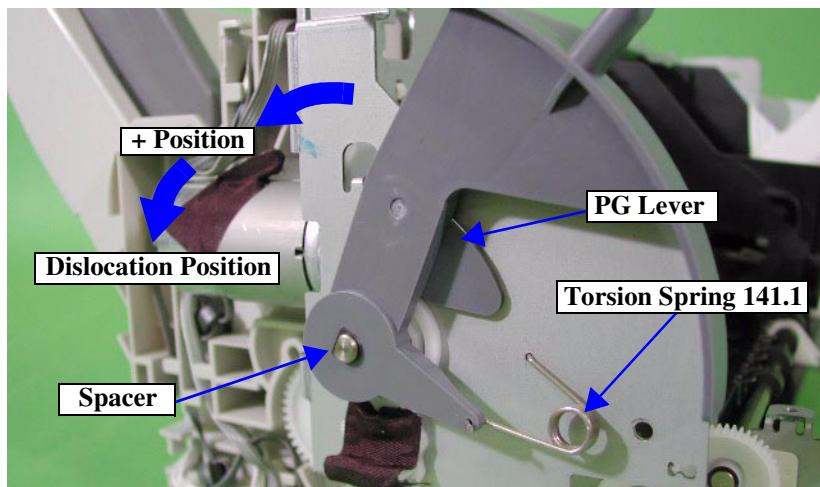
Torsion Spring 141.1 and PG Lever Removal
